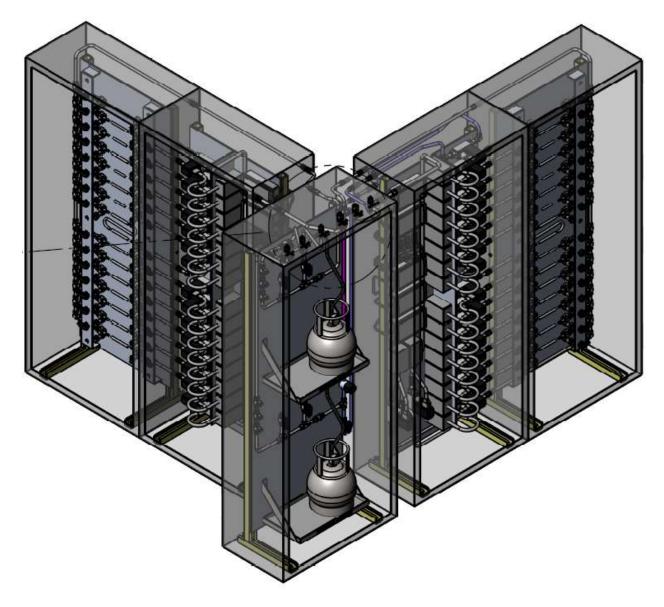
Isometric of Sampling System Intake (center cabinet), Inlet Manifold (far left), Inlet Control (center-left), Exhaust Control (center-right), and Exhaust Manifold (far right) Cabinets.
